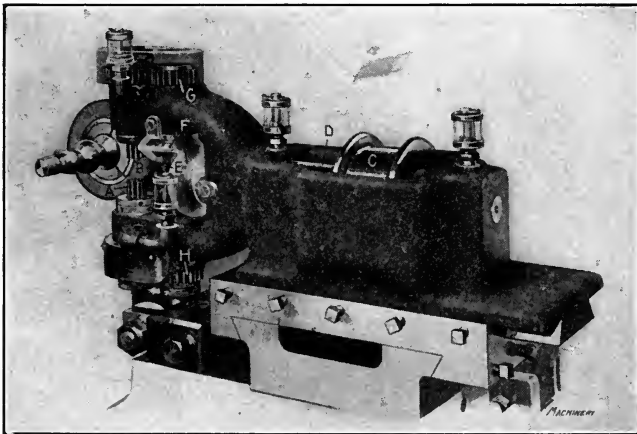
Acme Slab Milling Attachment equipped with Two End-mills
